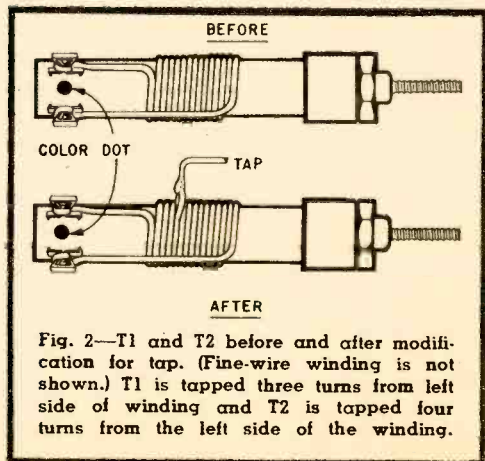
T1 and T2 before and after modification for tap. (Fine-wire winding is not shown.) T1 is tapped three turns from left side of winding and T2 is tapped four turns from the left side of the winding.
